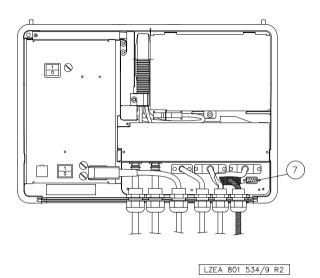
Connecting the FE alarm cable, TSRA 905 44 to BRU3 (Pos 7).
